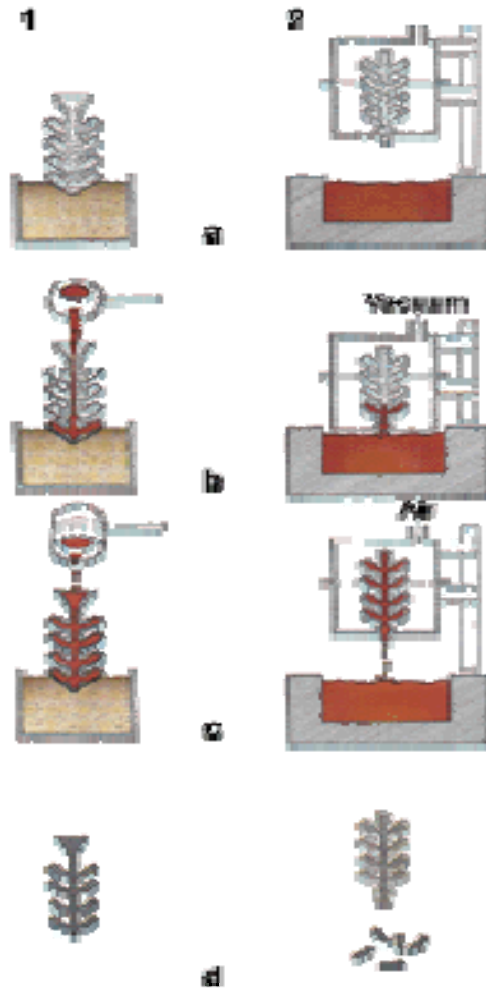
(a) Mold casing (b) Molten metal is poured into casing; method 1 uses gravity, where method 2 uses vacuum (c) Excess molten metal is removed and allowed to cool (d) Cooled positive metal mold is obtained (Harvest Technologies).
